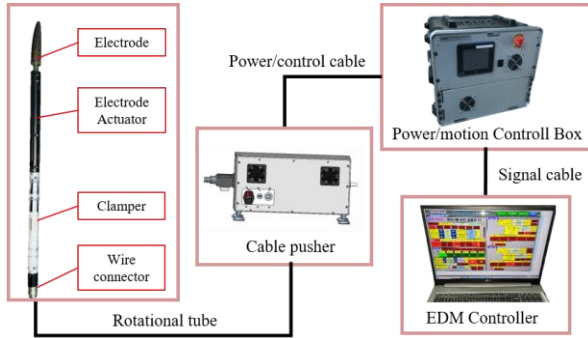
Set-up of the in-bore electrical discharge machining test for bending SG tube.
